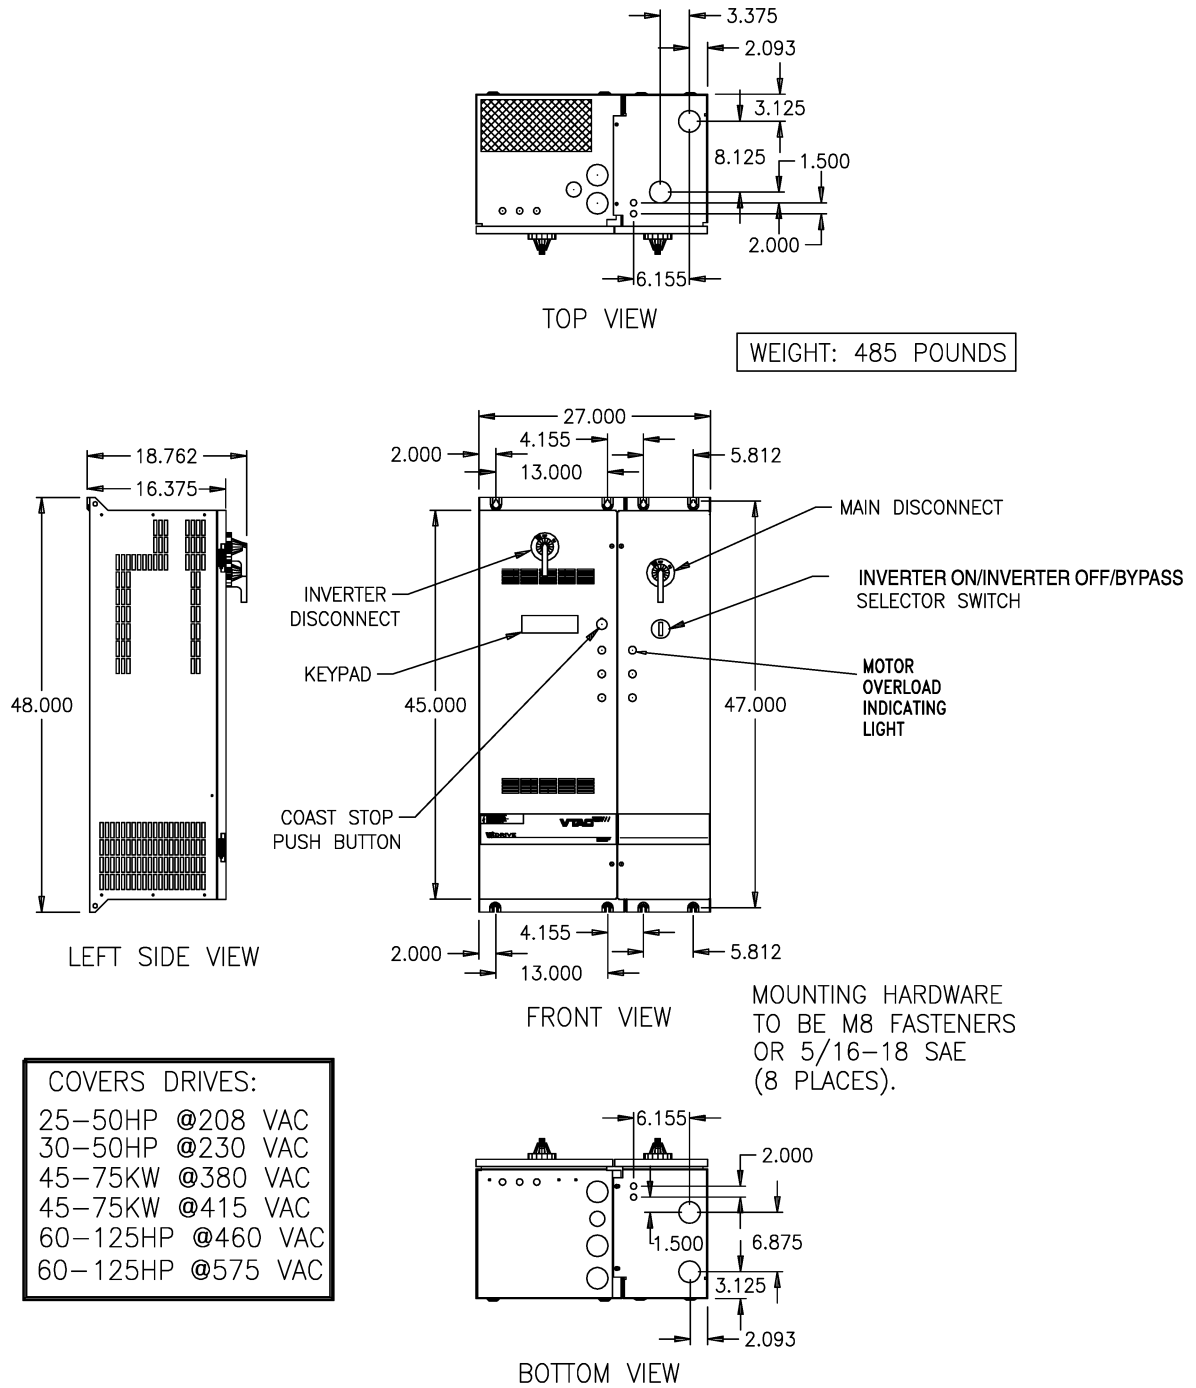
Bypass Physical Dimensions (with Inverter Section).
